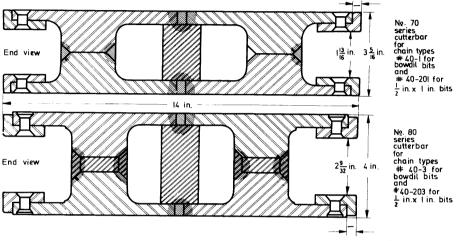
Cross-sections of typical cutter bars. (The Bowdil Company.)
